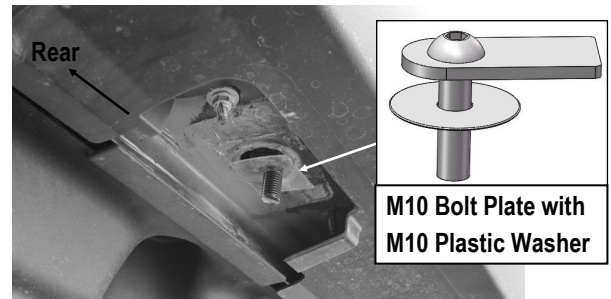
Passenger Side Center & Rear Mounting Bracket Installation
